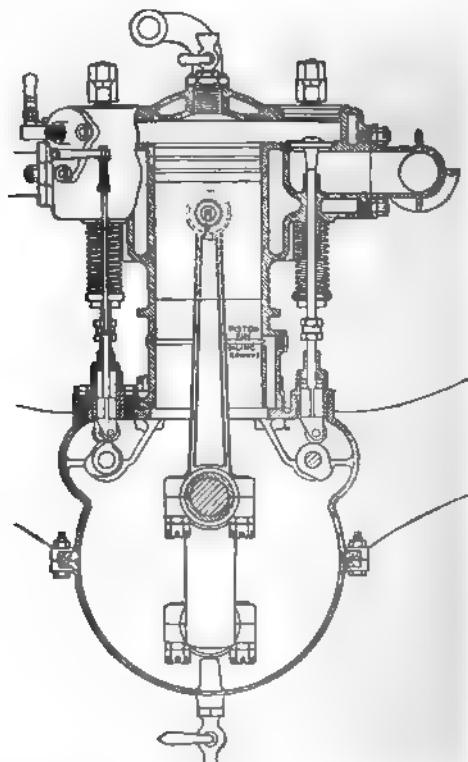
Section Through a Cylinder of a Gasoline Engine, showing arrangement for operating inlet and exhaust valves from two separate cam-shafts. This engine is ignited by a primary spark, operated by a separate cam on the inlet cam shaft.
